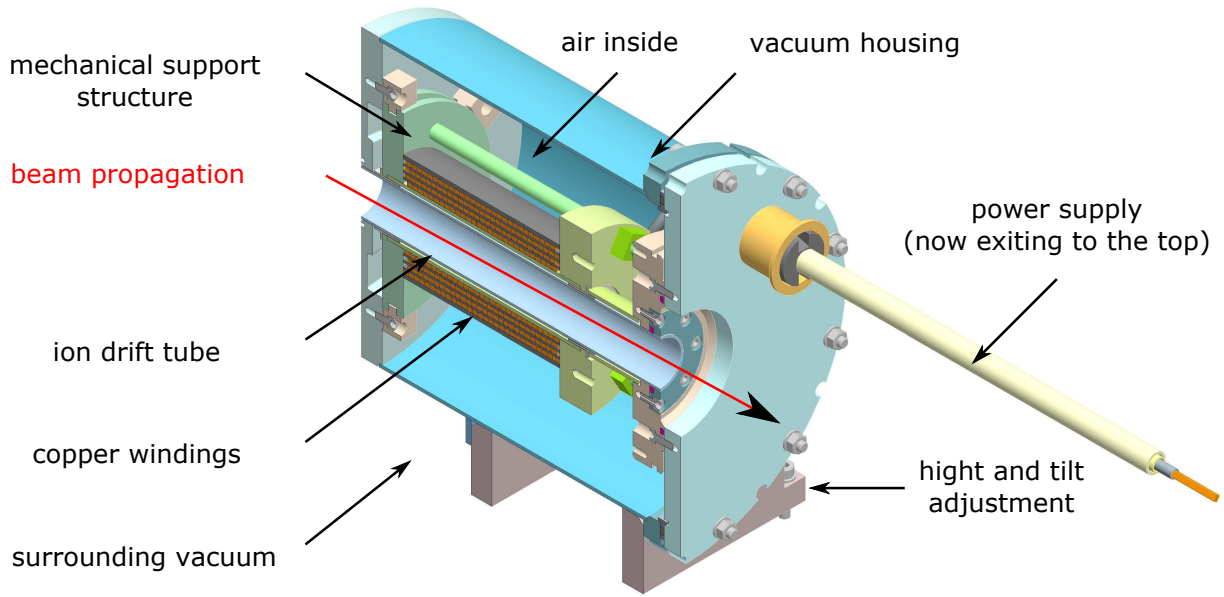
Technical drawing (cut) of the solenoid. The coil is housed inside a sealed chamber and positioned in the vacuum target chamber for experiments. The particles propagate through a clear cylindrical aperture. To prevent disturbing magnetic fields at the exit of the solenoid, the power supply cables are led directly upwards in the current design. They are inside vacuum sealed tubes as well, connecting the air chamber of the coil with the ambient atmosphere outside the target chamber. These connections are additionally isolated to ensure that the stainless steel chamber of the solenoid is on floating electrical potential. This minimizes the breakdown probability.
